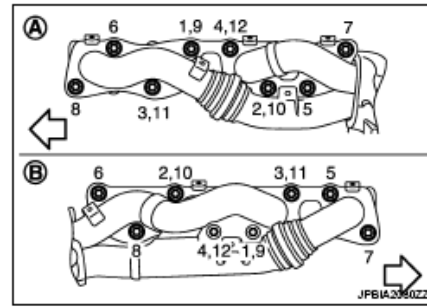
Identifying Exhaust Manifold Bolt Loosening Sequence
